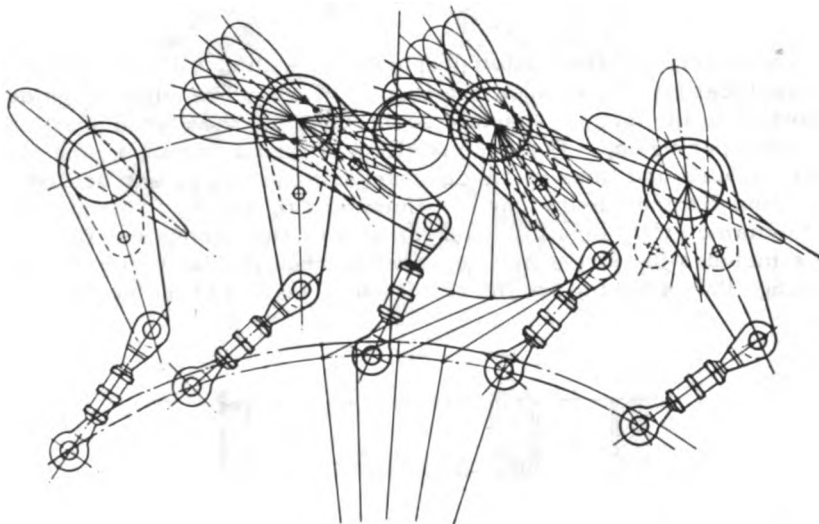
Graphical layout of a distributor with a breaking pin in the lever
